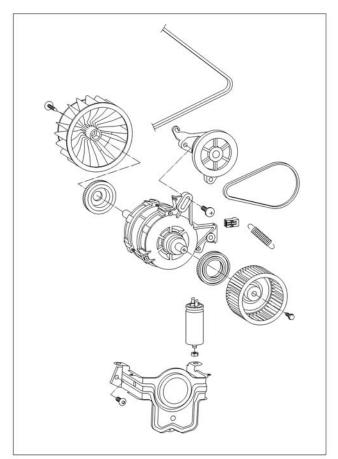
Motor and Fan Impellers (Condenser Models)
